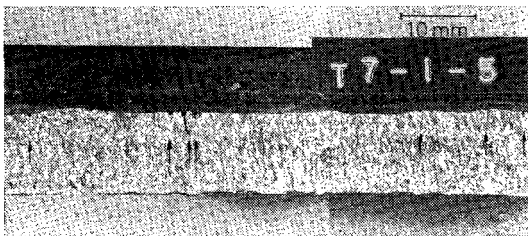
Configuration of Weld Metal at Root and Small Blowholes.
